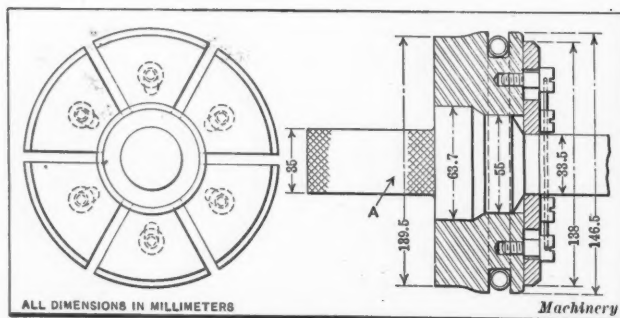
Sectional and End Views of the Expansion Arbor used in curling the Bottom of the Shell
